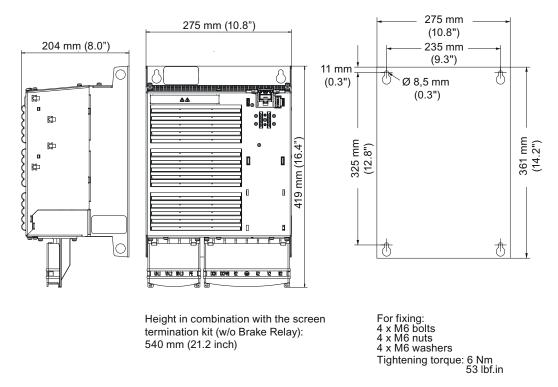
Dimensions and drill pattern for Power Module PM240, FSD, IP20, without filter
